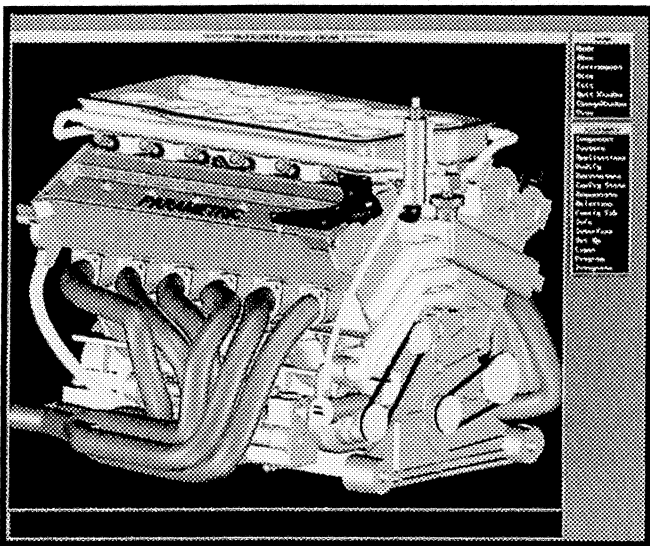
Parametric Design Using Pro/ENGINEER
